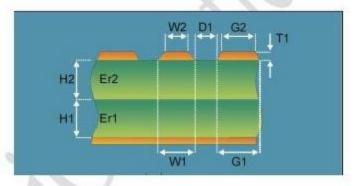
Multi-layer PCB board common-planar waveguide structure (reference for the third layer)
